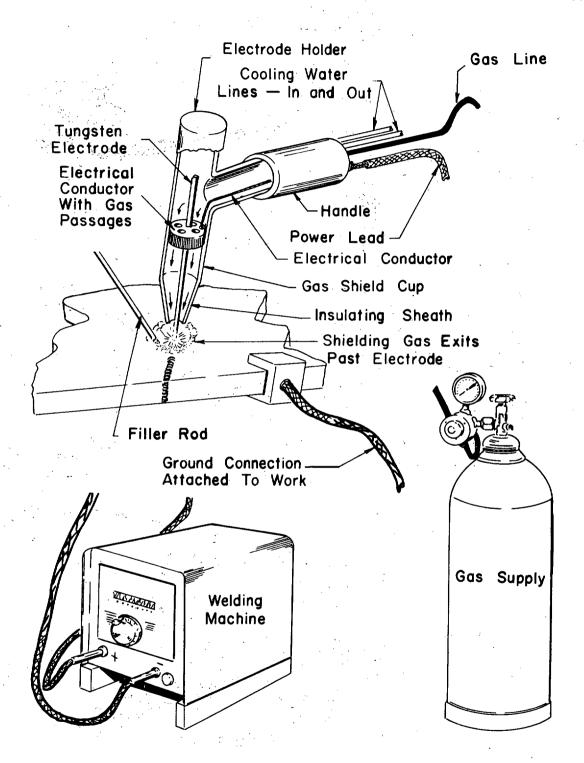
The Gas Tungsten-Arc (TIG) Welding Process
